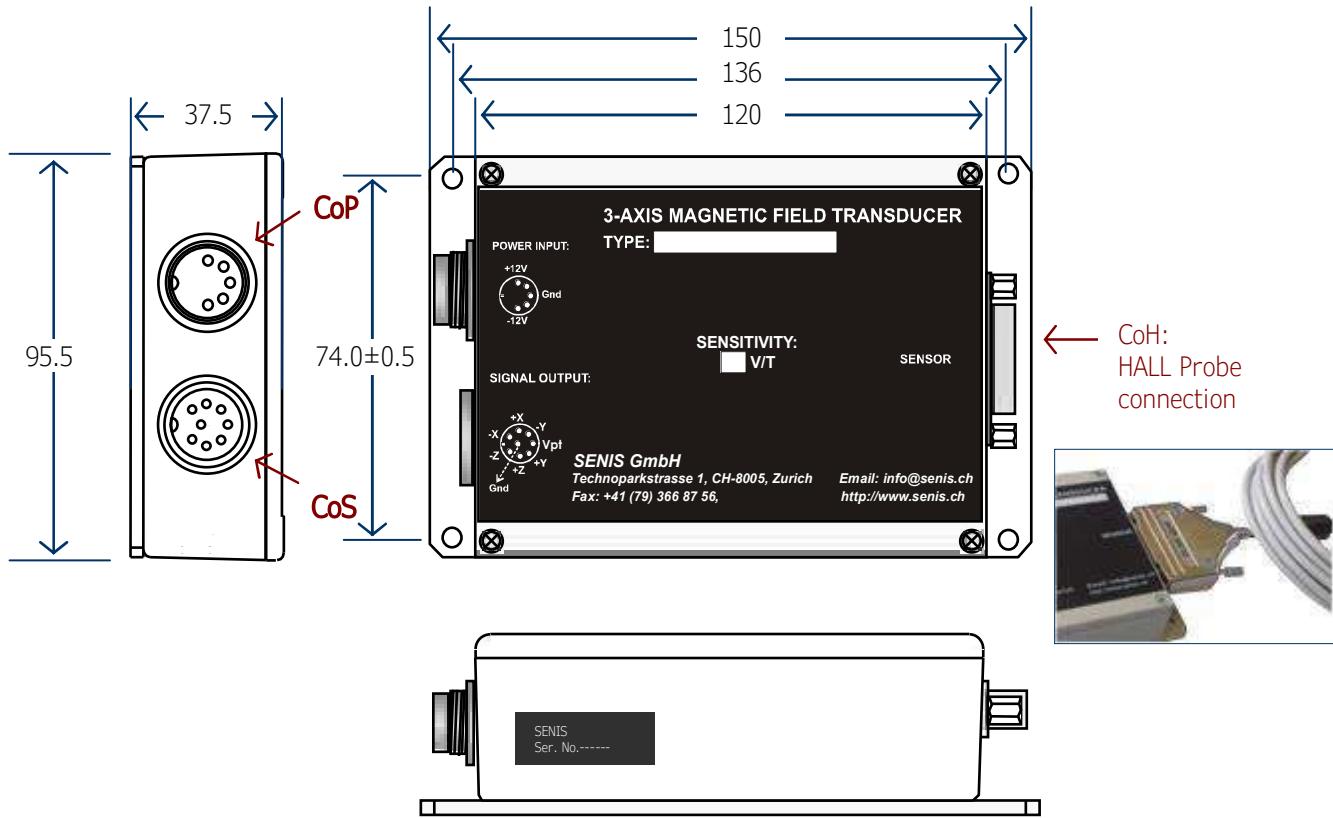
Dimensions and tolerances of the 3-channel analog processing module type A.1T25KJ
